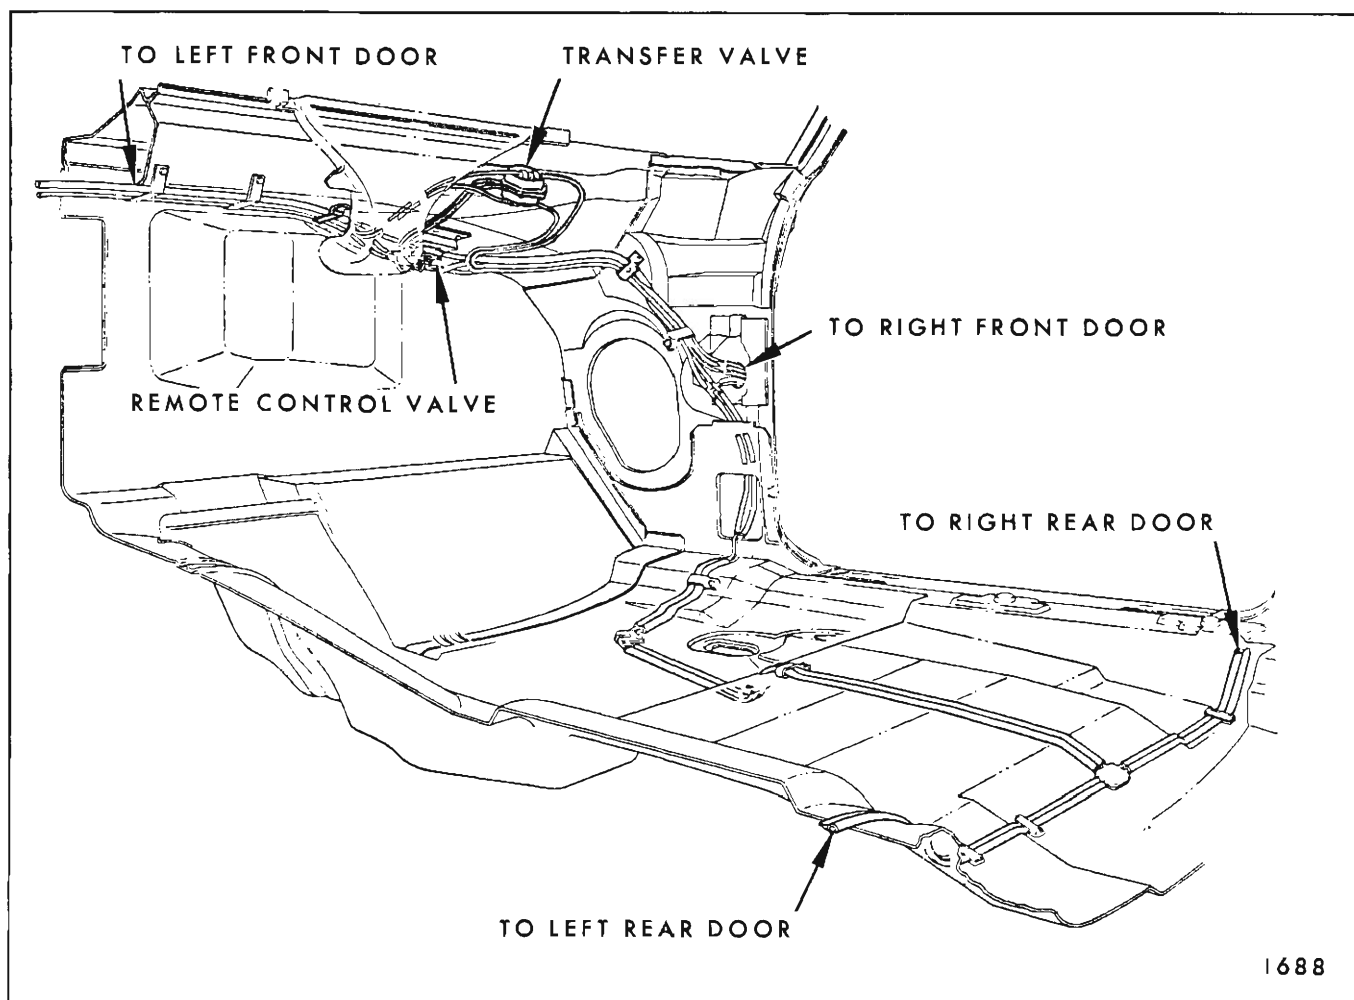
D48—Vacuum Door Lock Vacuum Hose Routing - Right Side of Body
